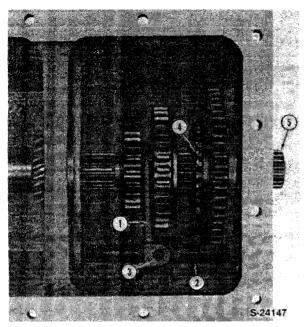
Range Gears, Countershaft, and Shift Rail Removal
